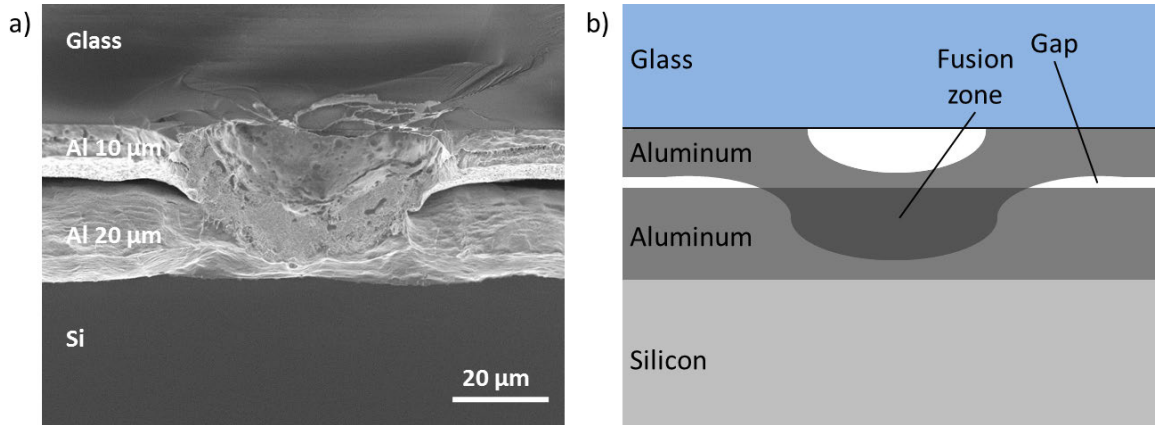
a) Scanning electron microscope (SEM) image of a cross-section of a laser weld spot. The weld spot is formed between a 10- μm -thick Al layer, which is evaporated on a glass substrate, and 20 μm of aluminum, which is evaporated on a Si wafer, using with 8 pulses with a pulse duration of 20 ns at 40 J/cm². b) Schematics of the SEM image in a).
